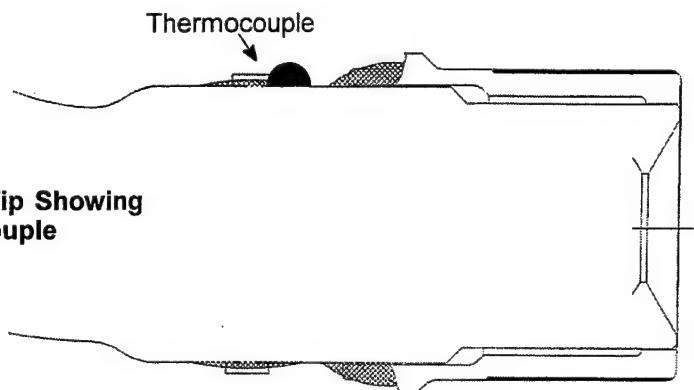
Outline of F110 Fuel Nozzle Tip Showing Location of Control Thermocouple
